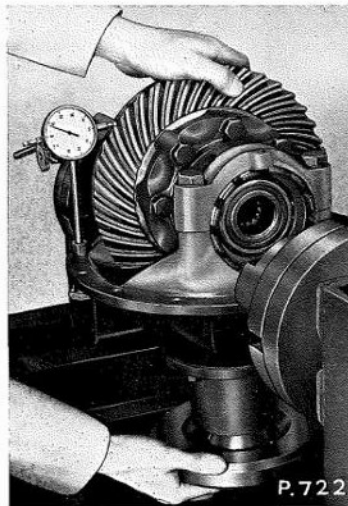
Checking for backlash between the crown wheel and bevel pinion teeth, using the Churchill Tool PT.4008
